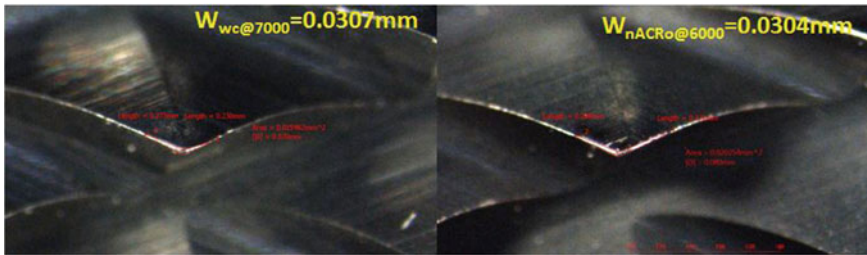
Flank wear of same solid carbide tools with and without nACRo coating
